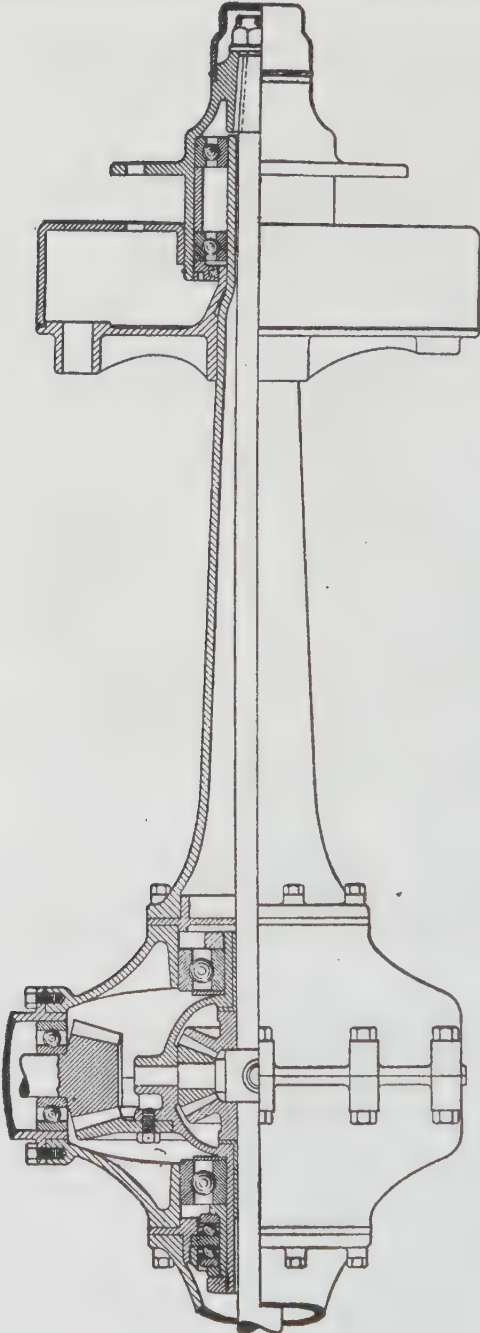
WHEEL THRUST TAKEN UP AT MIDDLE OF AXLE.
